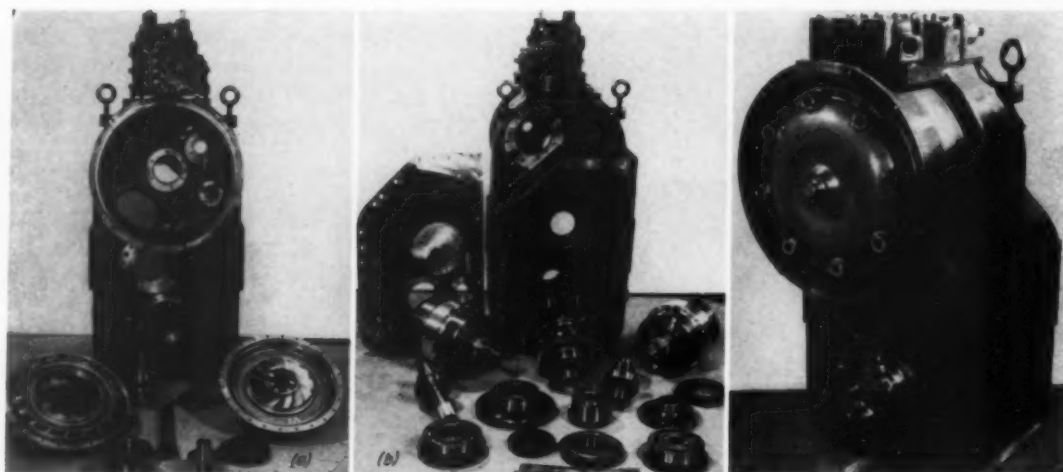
A transmission unit employing gears in conjunction with a hydraulic torque converter showing the converter end with converter parts exposed, *a*; the gear end with transmission gearing and clutch assemblies exposed, *b*; and a completely assembled unit, *c
